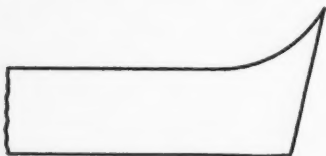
For turning copper a tool is used which has a built-up edge, extreme cutting rake, and plenty of clearance.
